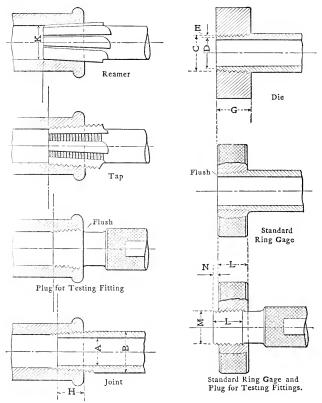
Reamer, Tap, Die and Gages for Briggs Pipe Standard
